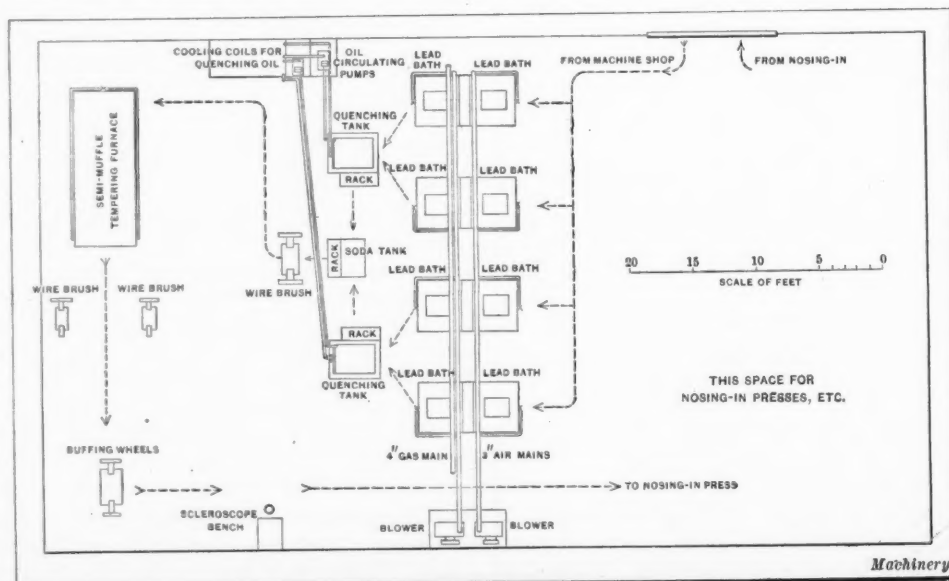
Layout of Heat-treating Department for Factory producing 12,000 to 15,000 Shrapnel Shells a Week
